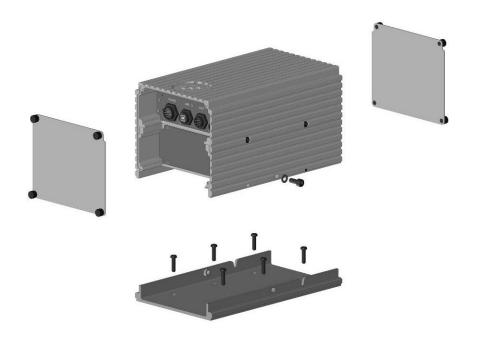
DVR Mounting Details – Full Duplex (With Duplexer)
